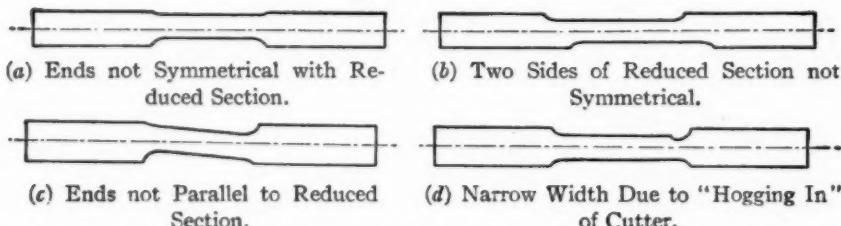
Common Errors in Preparation of Plate or Sheet Metal Test Specimens.
